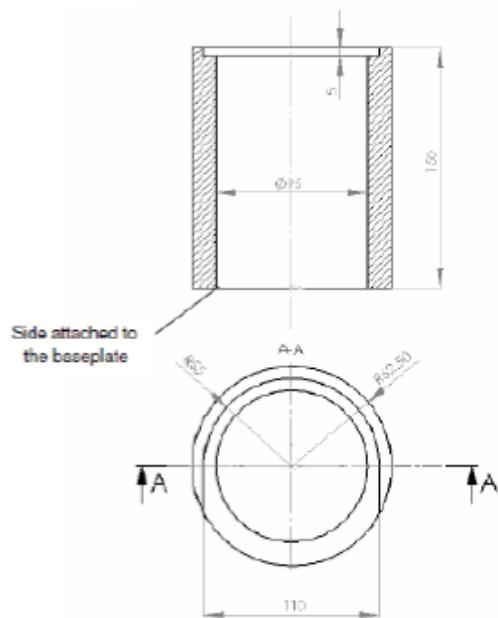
Supporting ring as a base for the guide rod head
